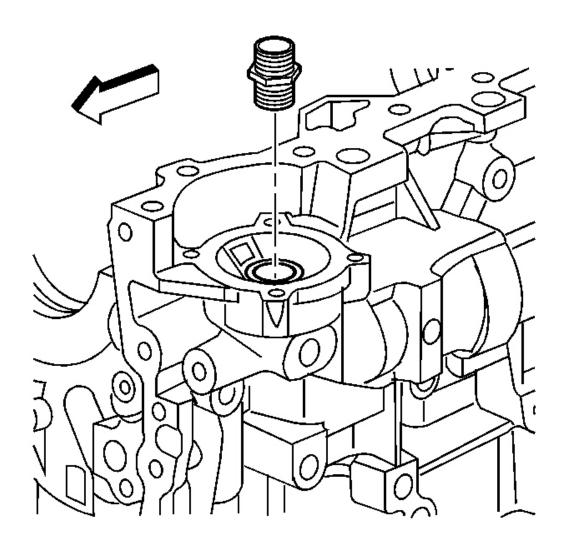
View Of Oil Filter Adapter Courtesy of GENERAL MOTORS CORP.
